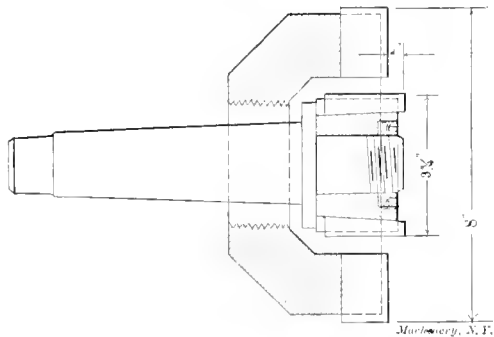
Construction of Cutter for Milling Grinder Bases.
